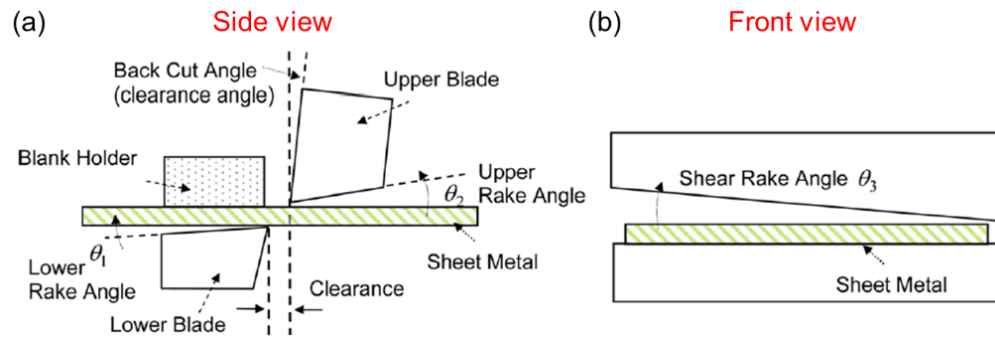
Schematic of shearing tools with adjustable shearing angles (a) side view, and (b) front view [32]–[34].
